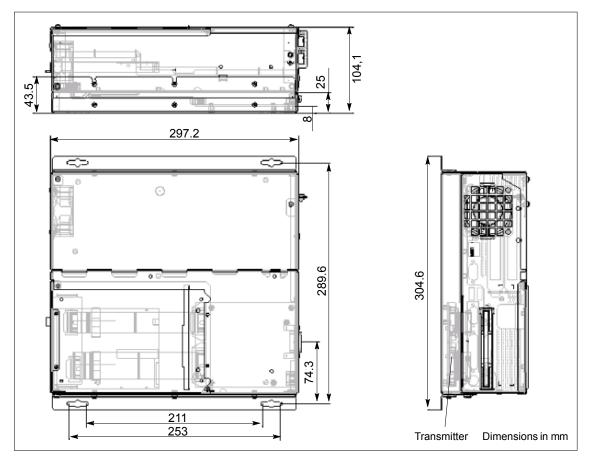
Dimensions computing unit PC 670 without CD-ROM drive in distributed configuration including transmitter
